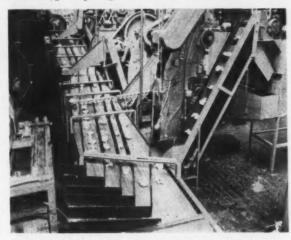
A sectioned conveyer belt between rows of 6 die casting machines moves the various castings to machining operations.
